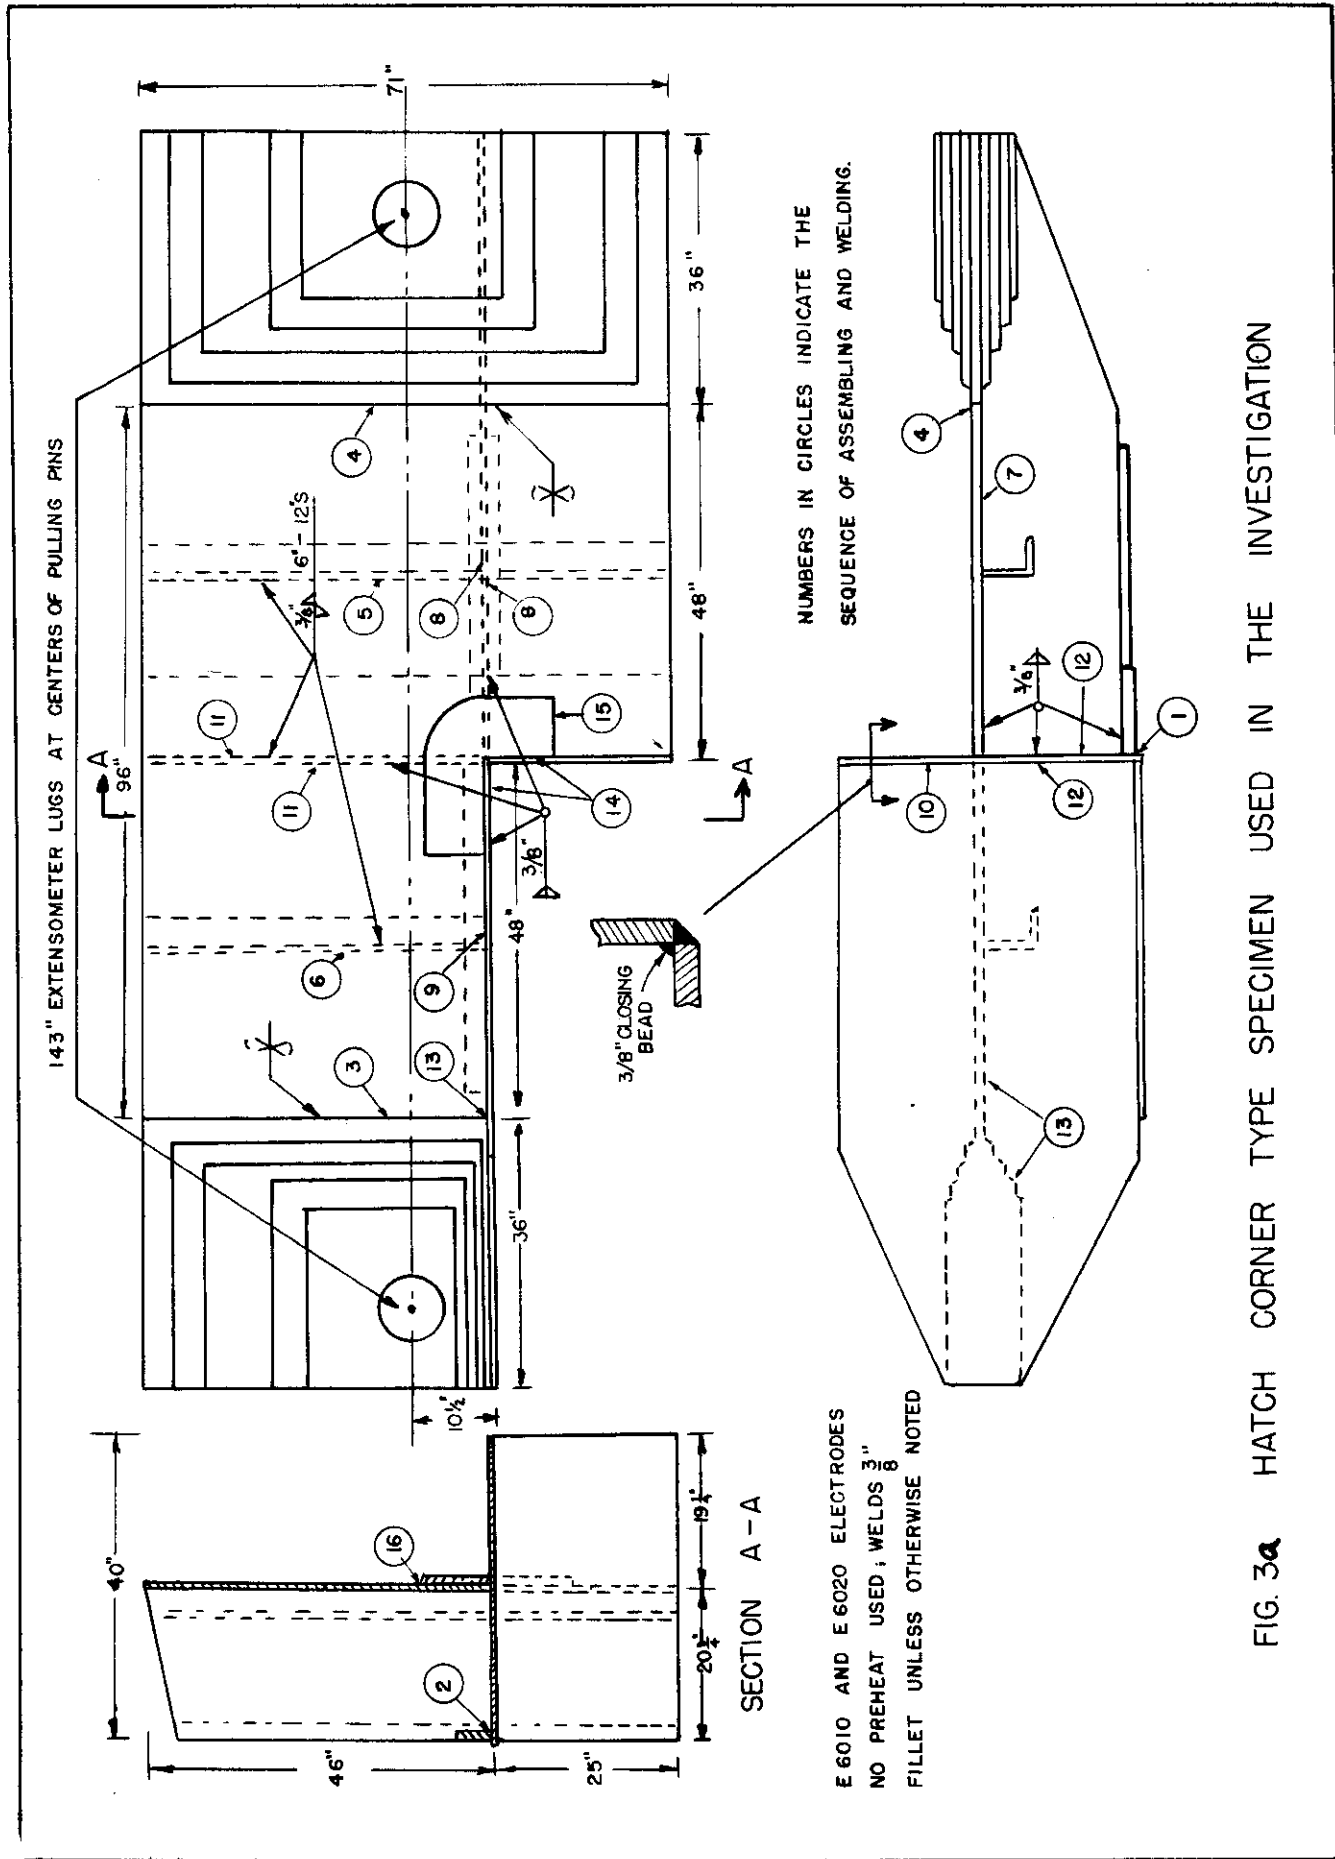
HATCH CORNER TYPE SPECIMEN USED IN THE INVESTIGATION
